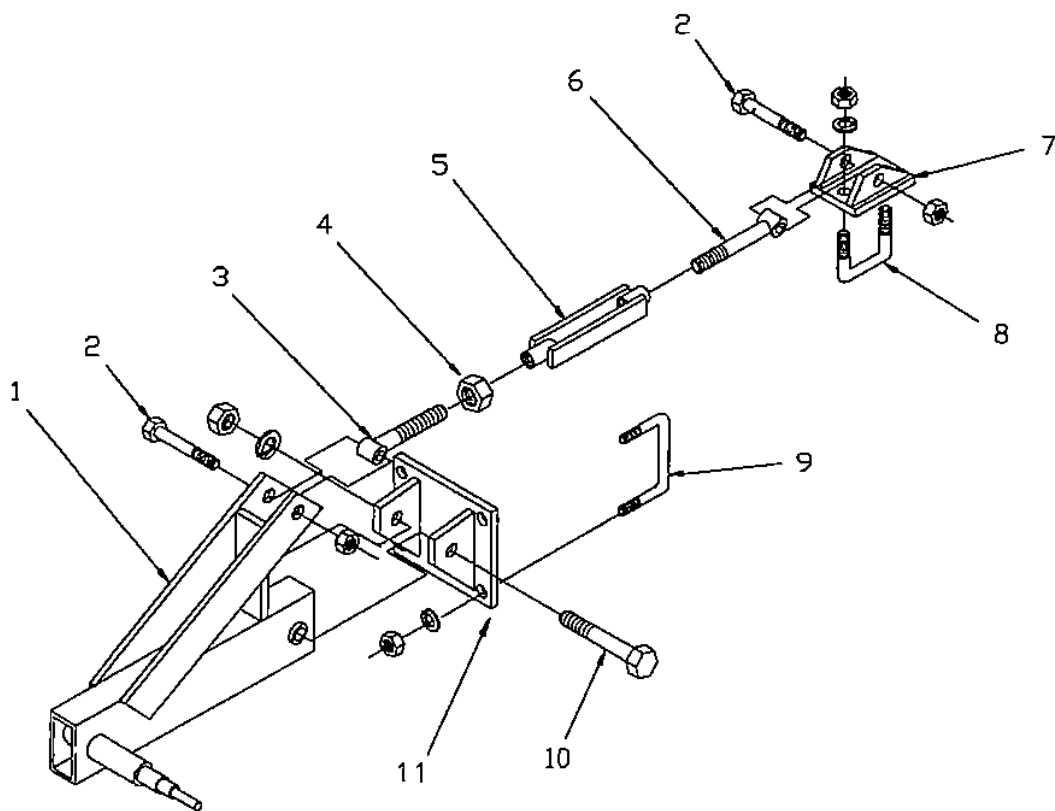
TURNBUCKLE GAUGE WHEEL COMPONENTS - rigid frame
